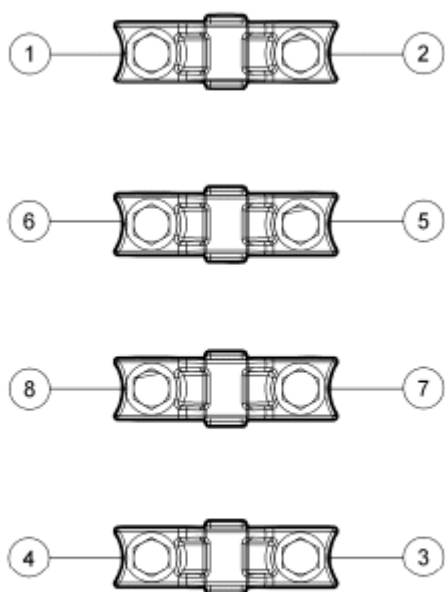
Locating LH Cylinder Head Camshaft Front Bearing Cap And Bolts
